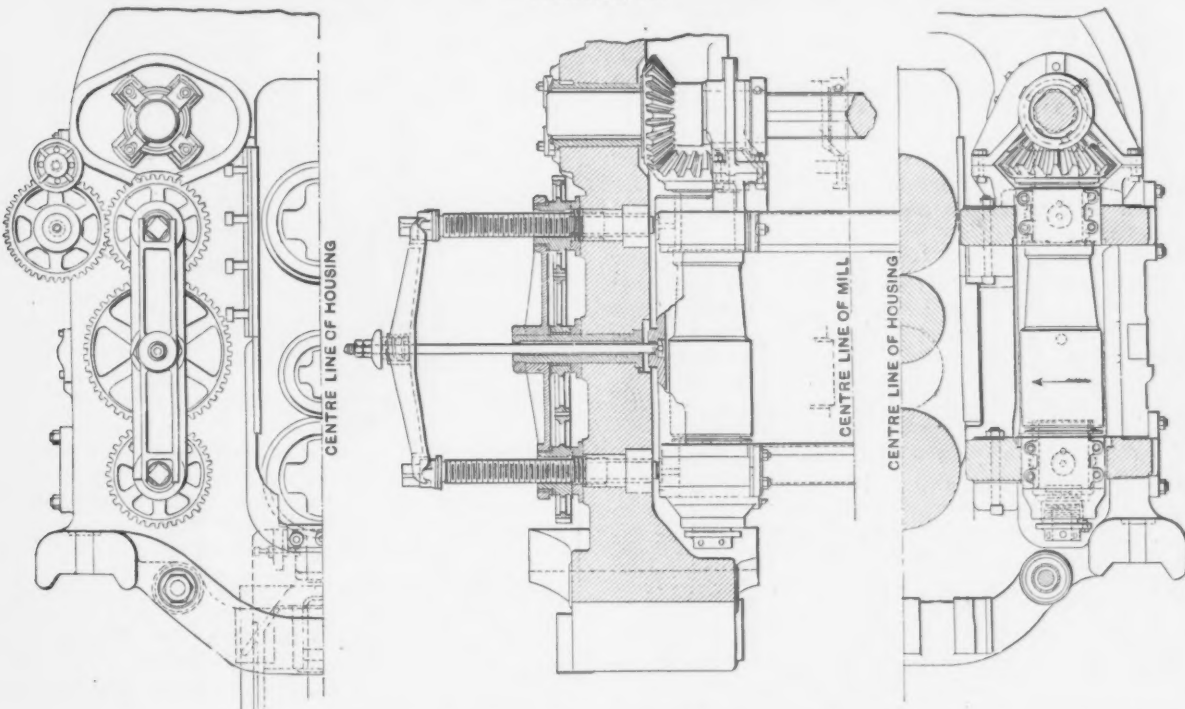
Details of One Housing, Showing a Part End View, a Lateral Section through the Center of the Vertical Rolls and a Part Sectional View Inside of the Housing.
